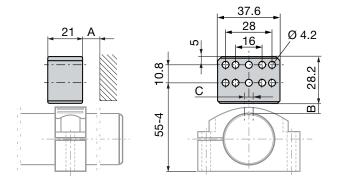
Dimensions and spacing with magnet BTL6-A-3800-2
